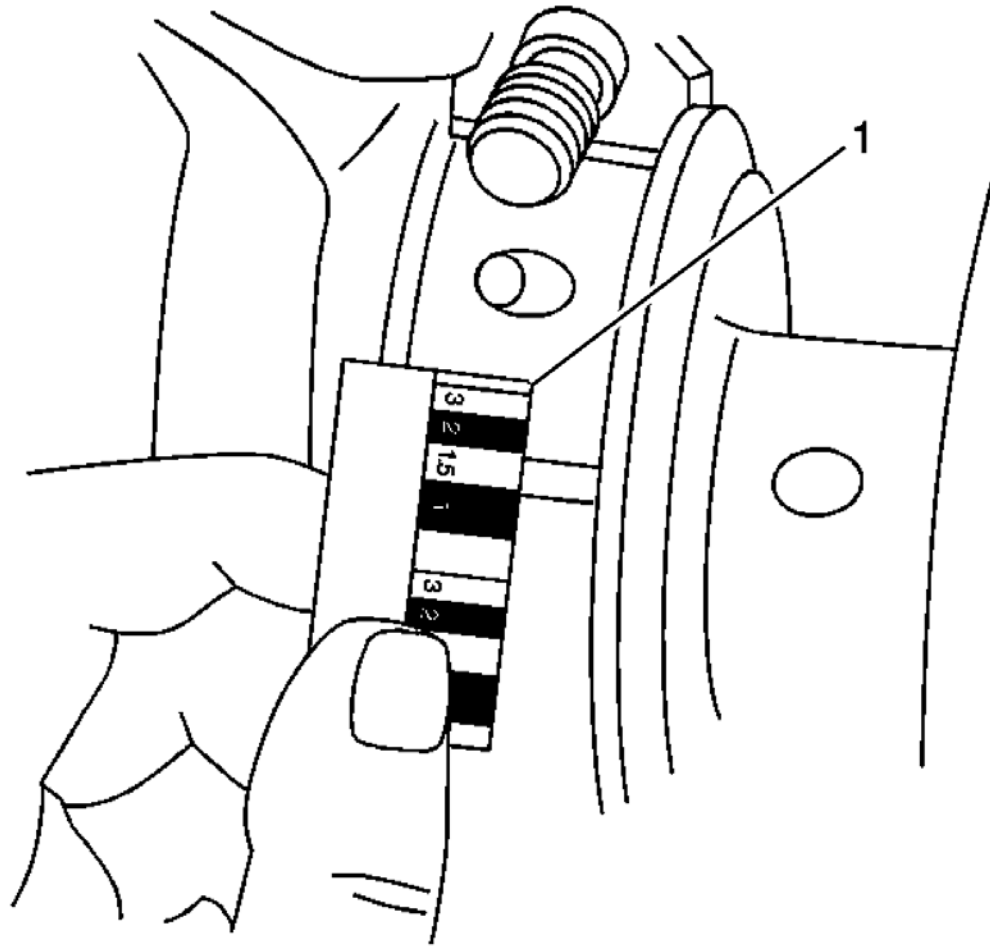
Measuring Bearing Clearance With Gaging Plastic Using Method B
